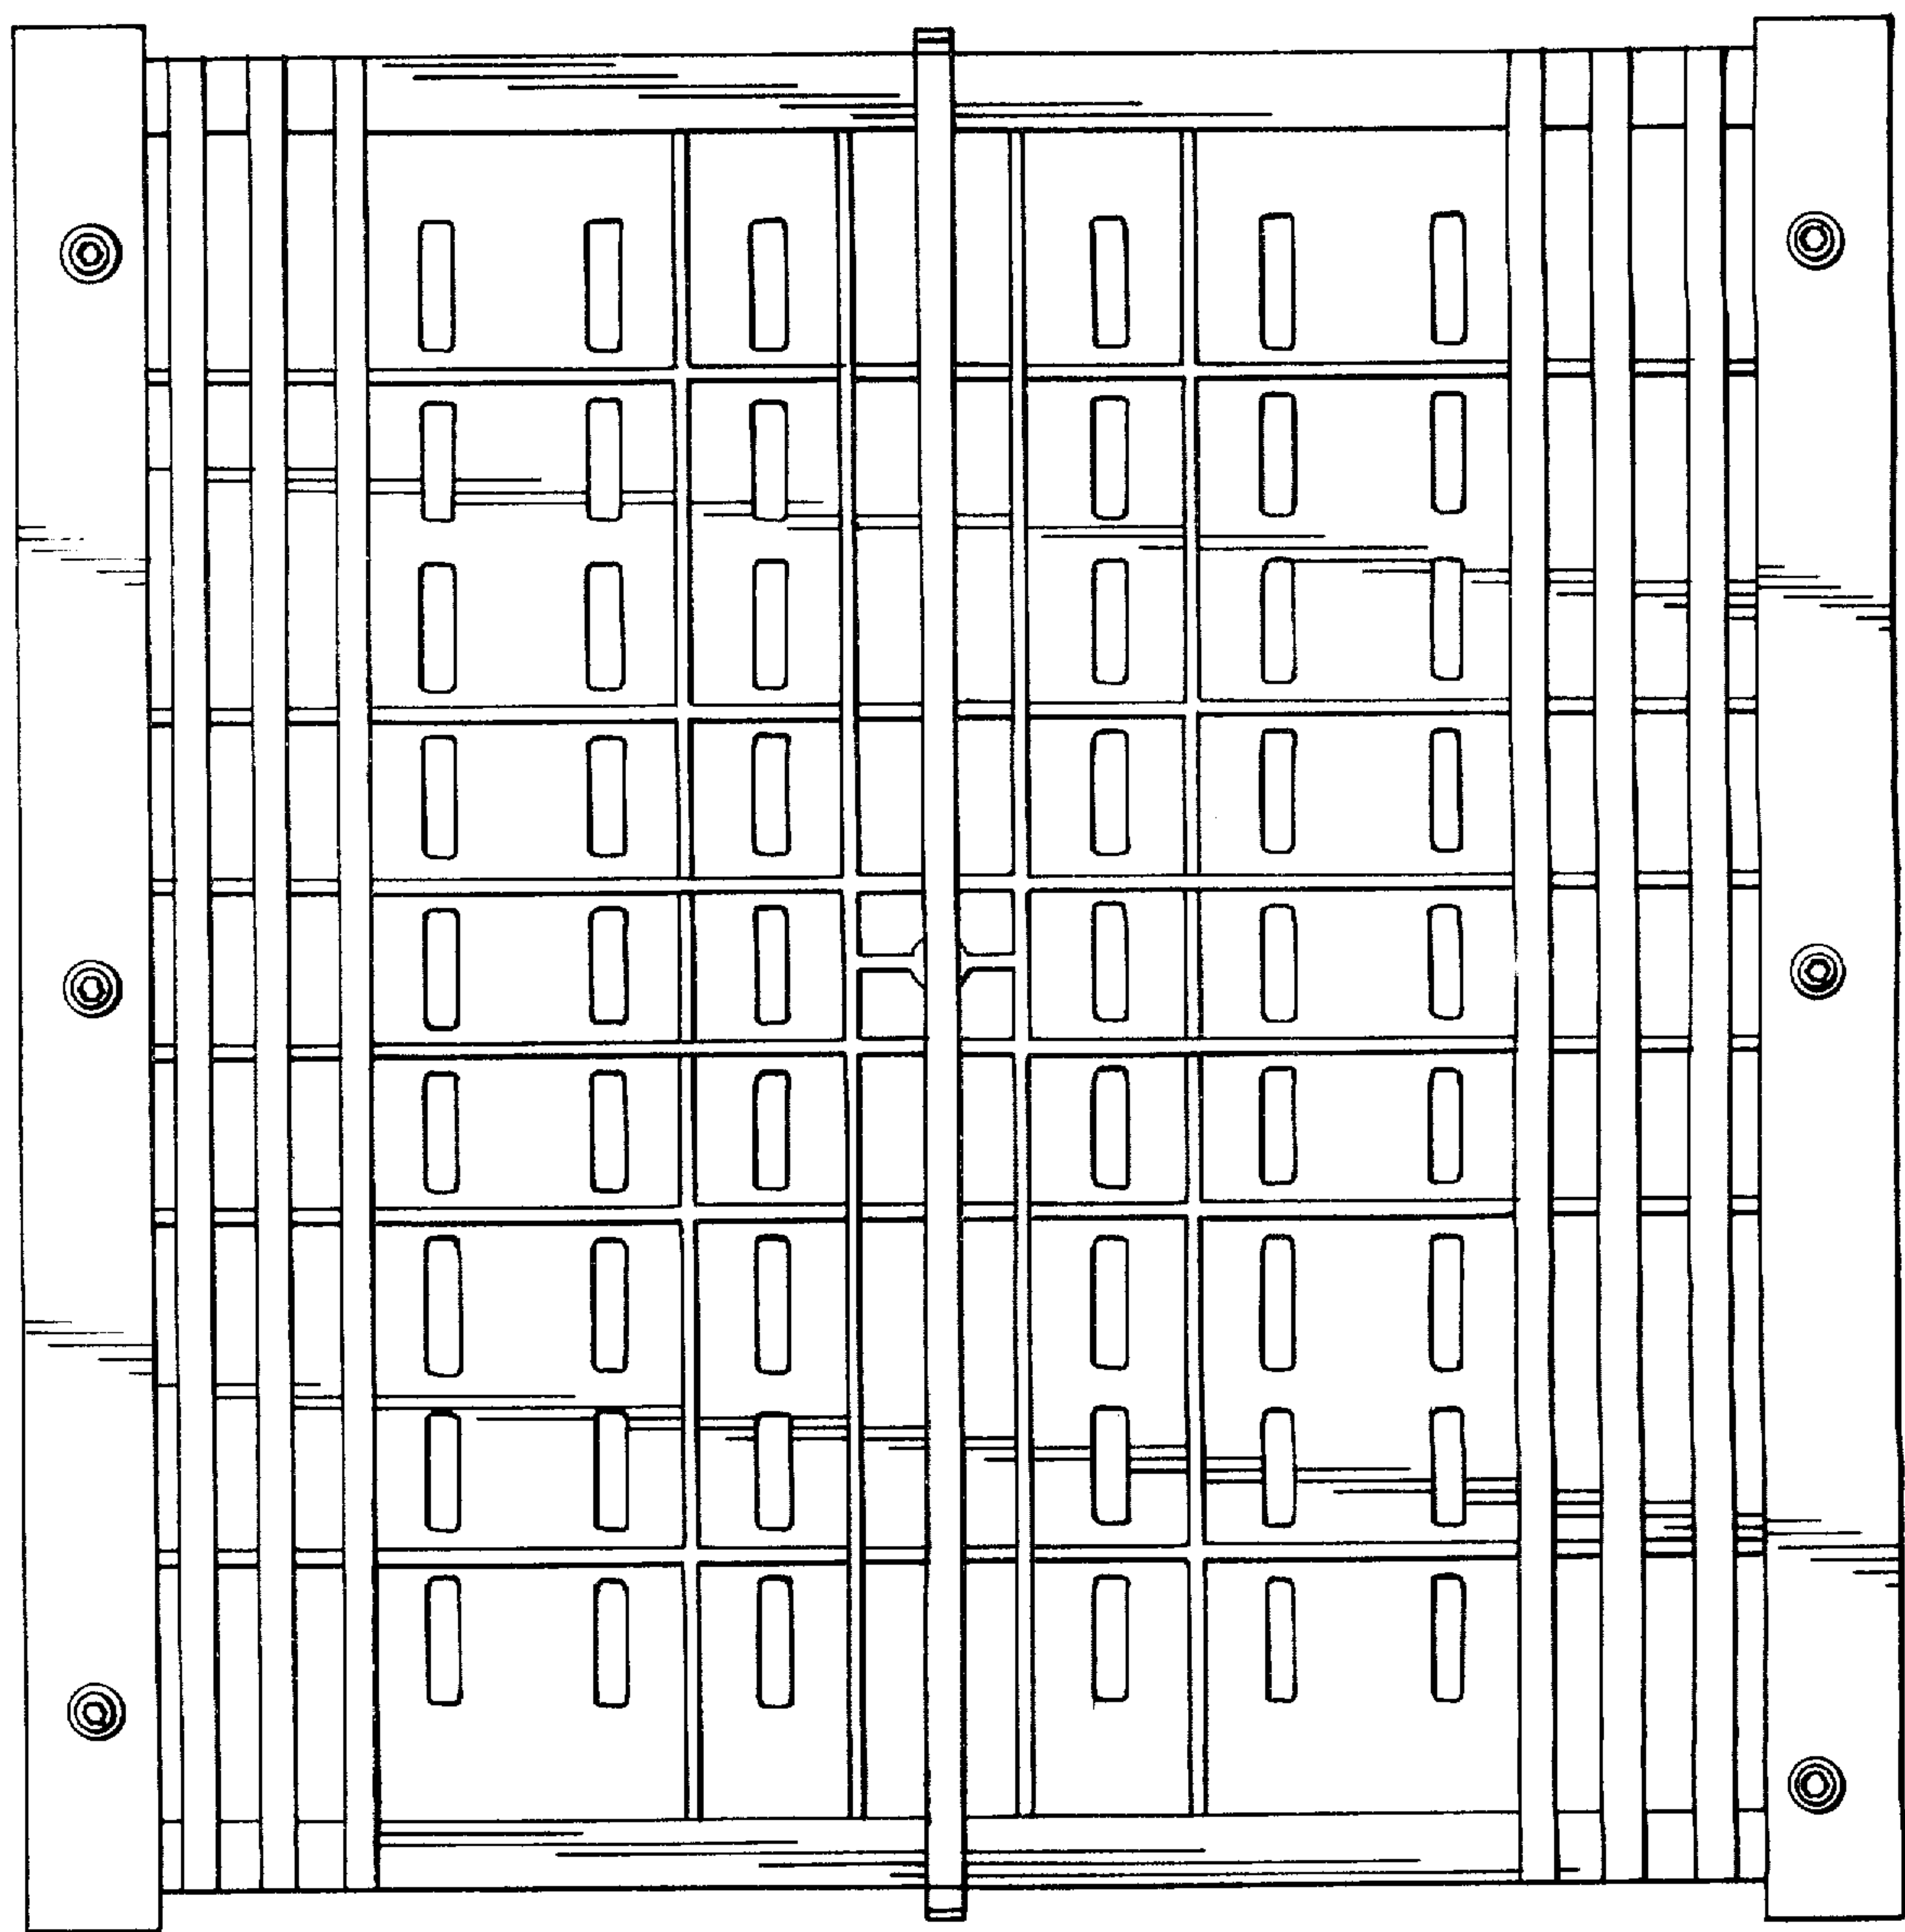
is a cross sectional view taken through a mid-plane perpendicular to FIG. 2; and
